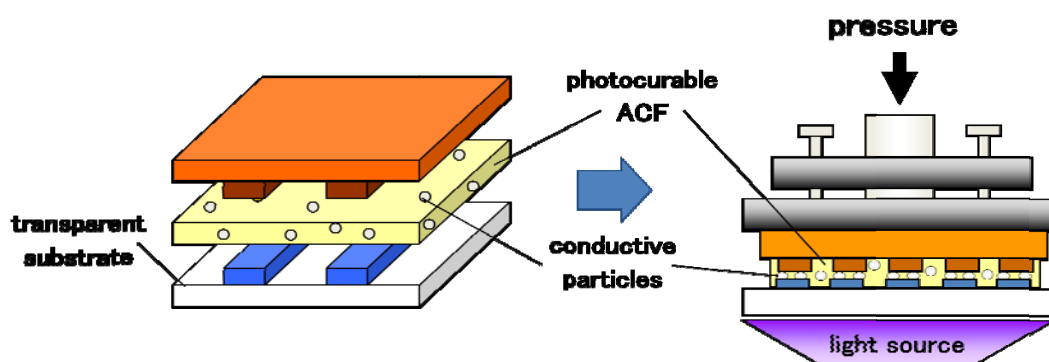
Flexible printed circuit assembly using proposed photopolymerizable ACF.
